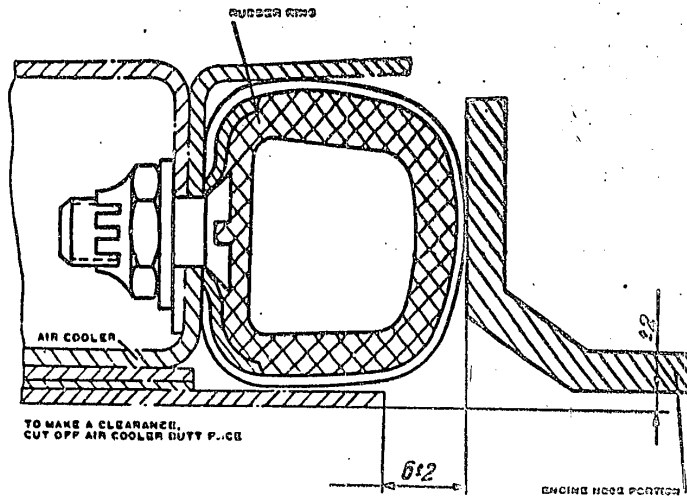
ENGINE COMPARTMENT SEALING SHAPE ATTACHMENT
